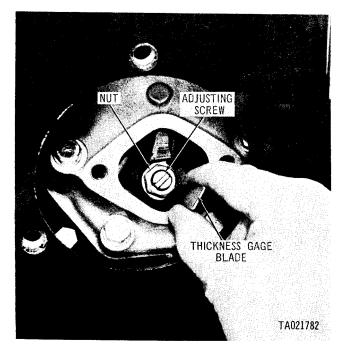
Setting intake valve cleamnce for cylinder 6R.
